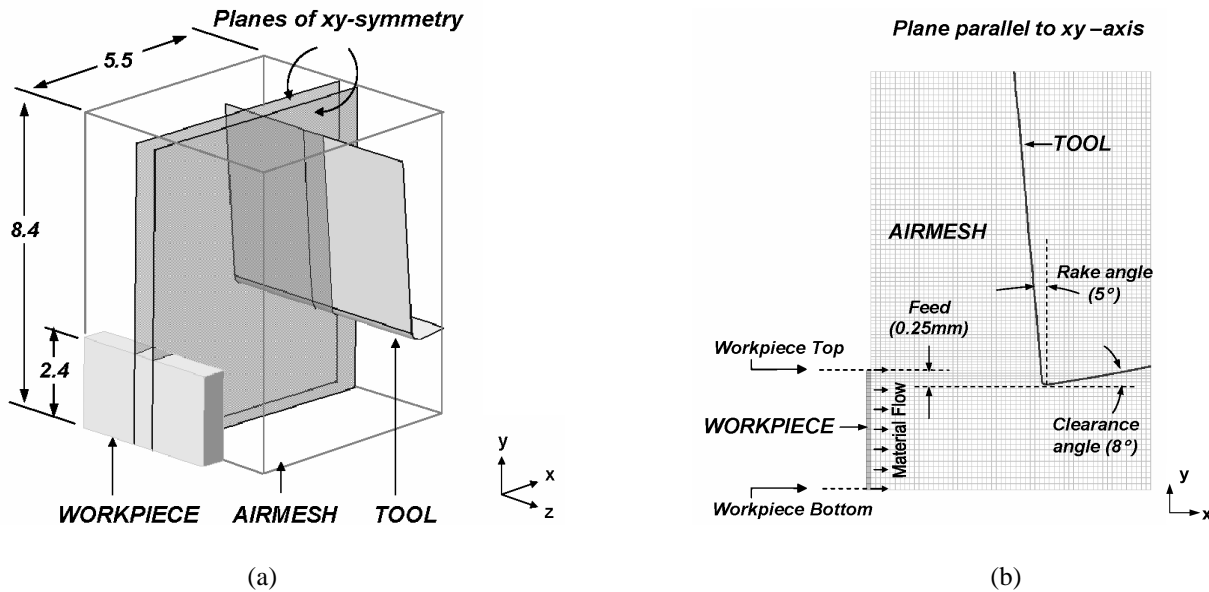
Geometry of the FE model showing: (a) a three dimensional view of pertinent parts, planes of symmetry, and dimensions in millimeters, and (b) a cross-sectional view of element distribution.
